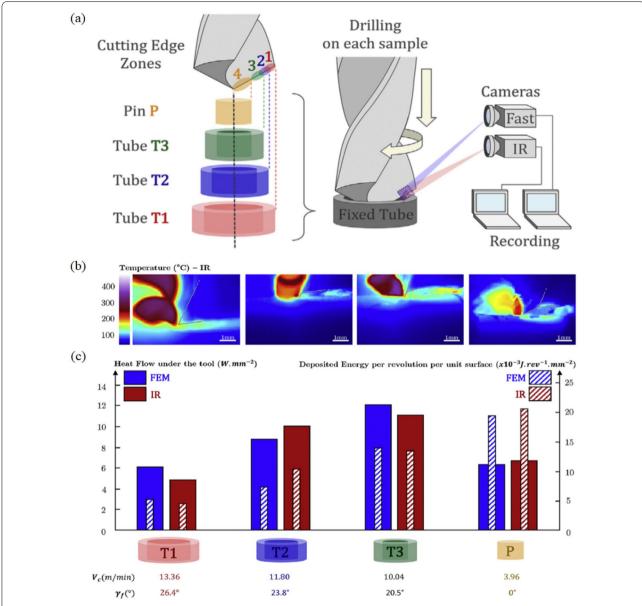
Measuring cutting heat by using IR camera: a Experimental set-up, b IR Temperature, c Heat Flow under the tool and deposited energy per rev per unit of the workpiece surface [17]
